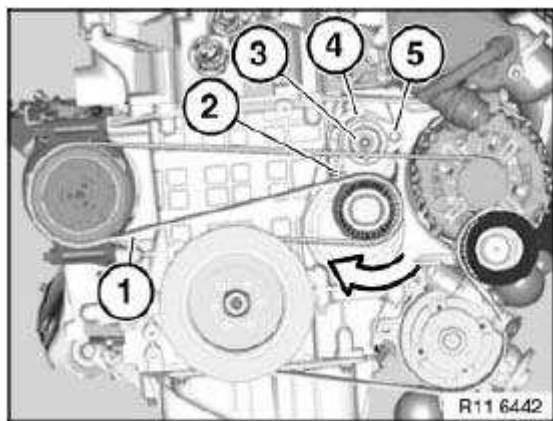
Belt Tensioner And Belt Tensioner Screw
